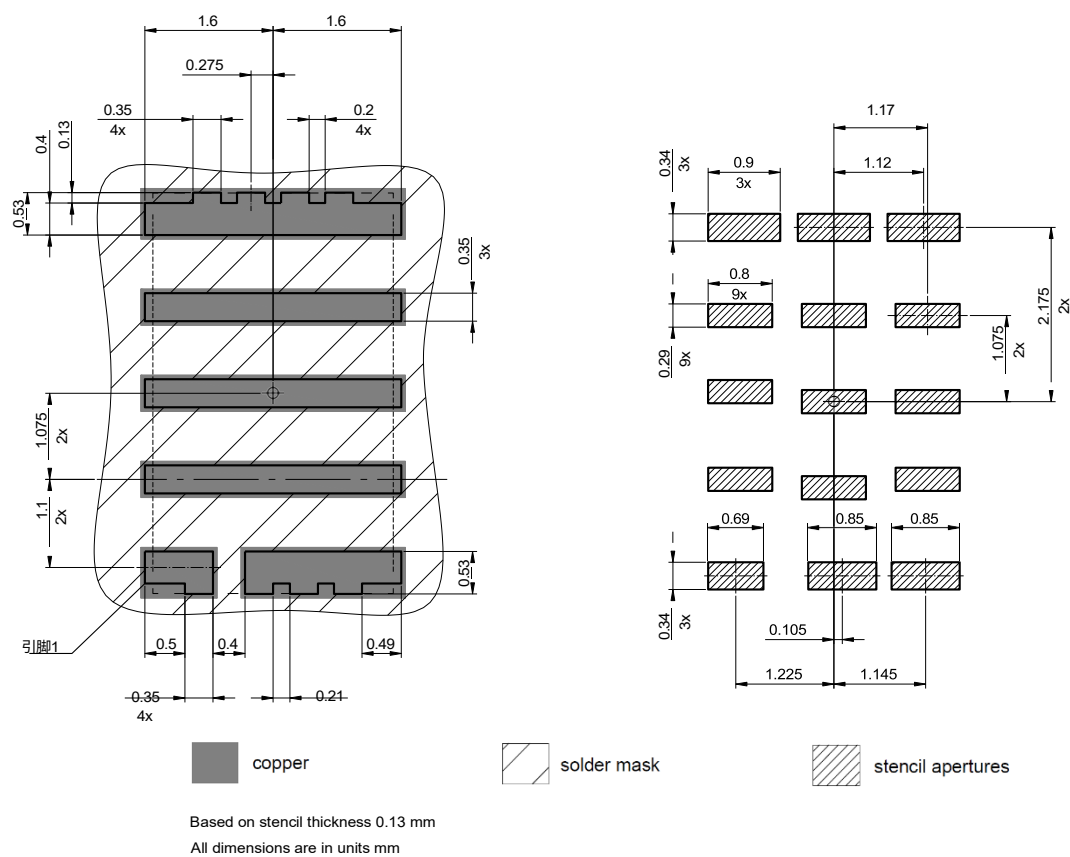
Footprint drawing PG- TSON- 6 , dimensions in mm
